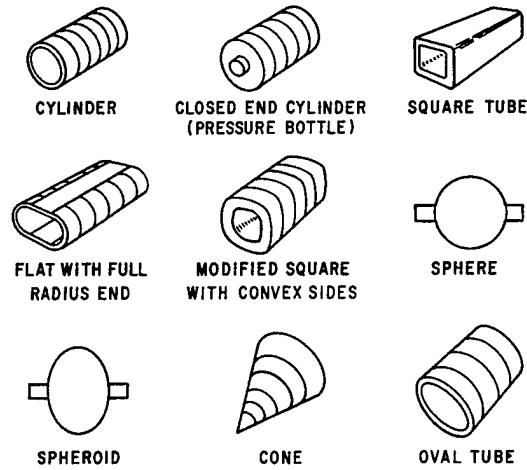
Suitable section shapes for filament winding. (Courtesy of Machine Design.)
